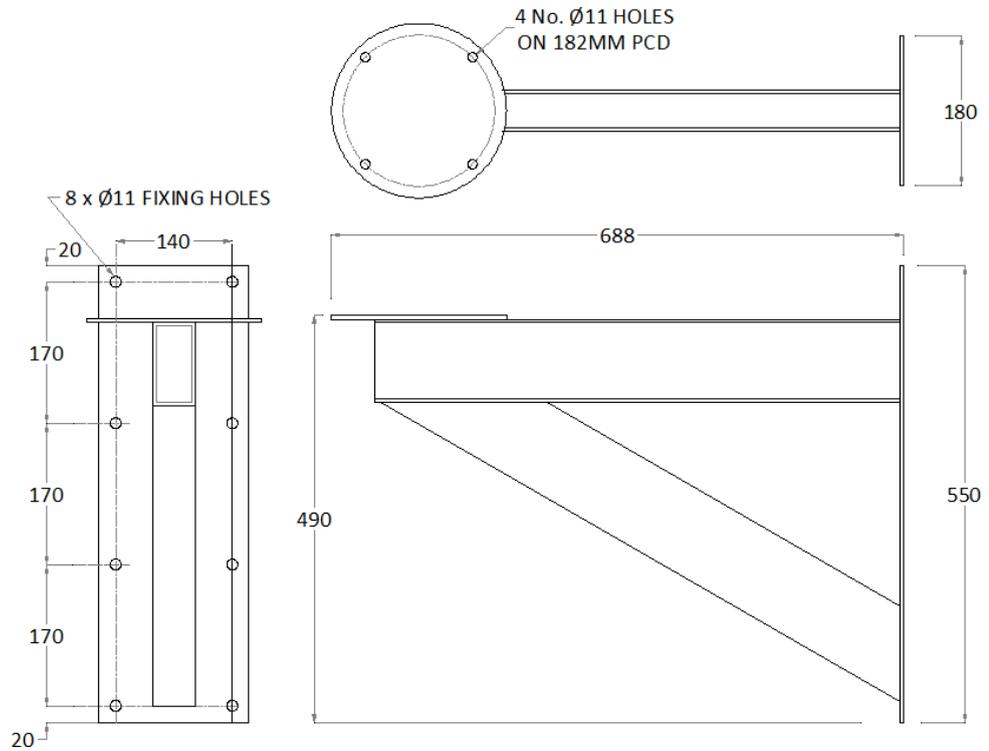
SC40VW Example SC Series unit showing shaft mount fixing points
